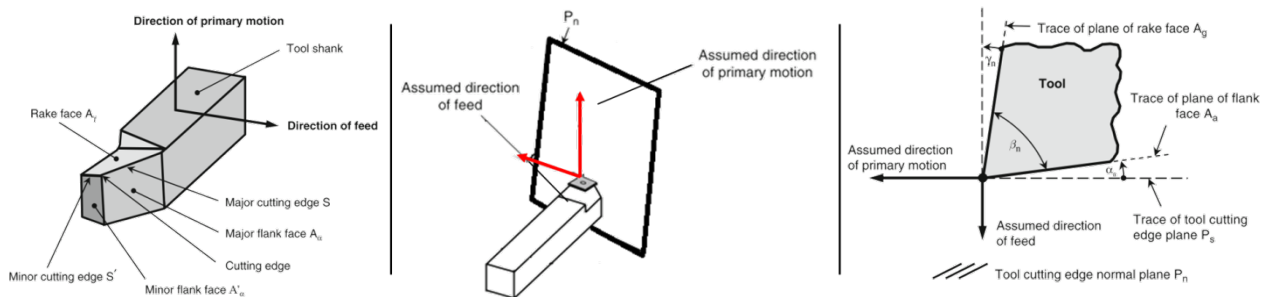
General machining tool geometry and the wedge cut (Adapted from KLOCKE, 2011).
